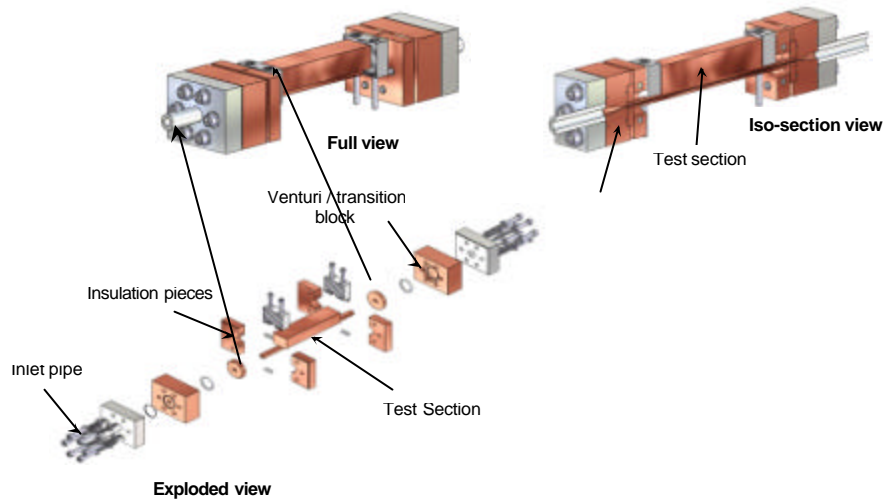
Test Section Assembly Design (Full view, iso-section view, and exploded view)
